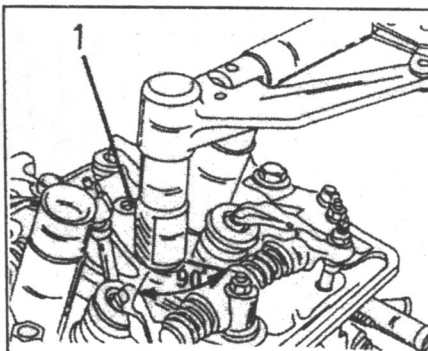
Angle-tightening of the cylinder head bolts when the angle is 90°. The socket (1) must be marked as shown.
